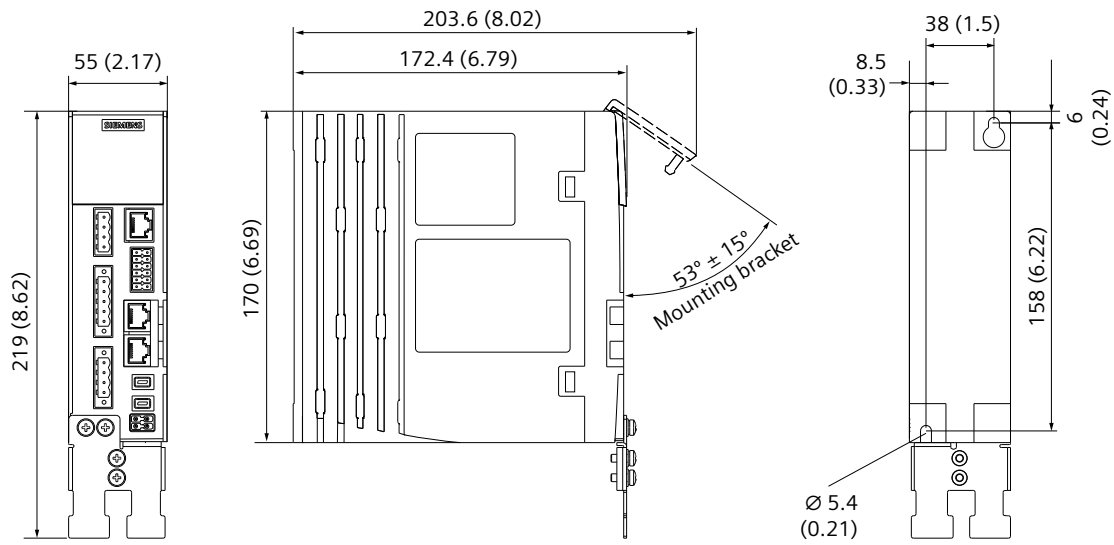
Dimension drawing SINAMICS S210 FSB, 1 AC, dimensions in mm (inch)
